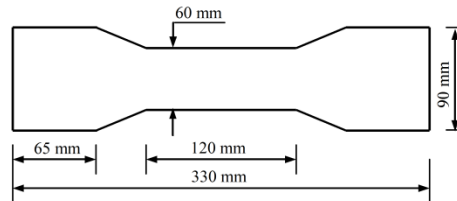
Geometry and dimensions of the dumbbell specimens used in this project.
